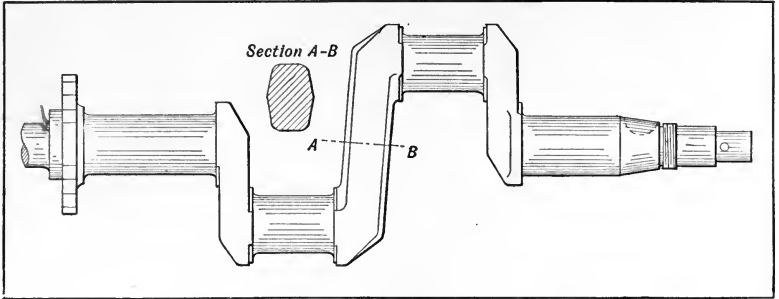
Showing Form of Crank Shaft for Twin-Cylinder Opposed Power Plant.
